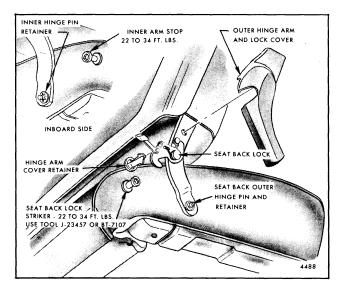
Adjustable Drivers Seat Back - Outer Side - Chevrolet "F" Styles
